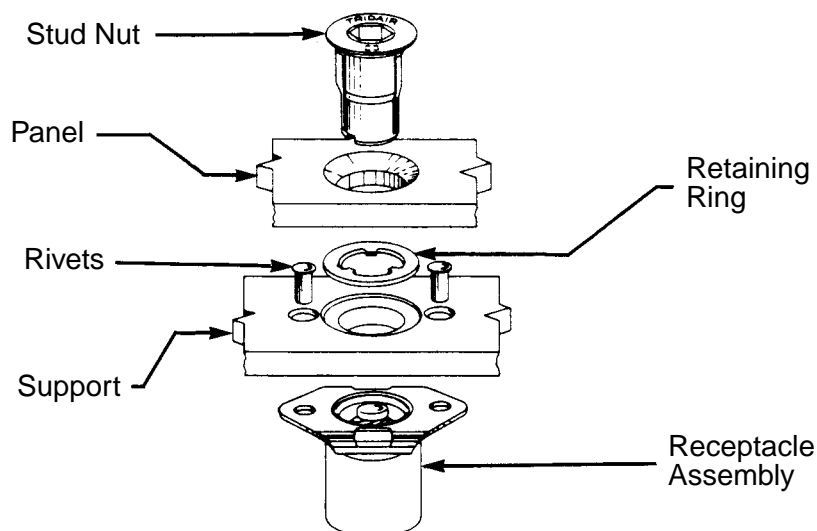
General Description of Panel Fastener Assembly (typ.)
